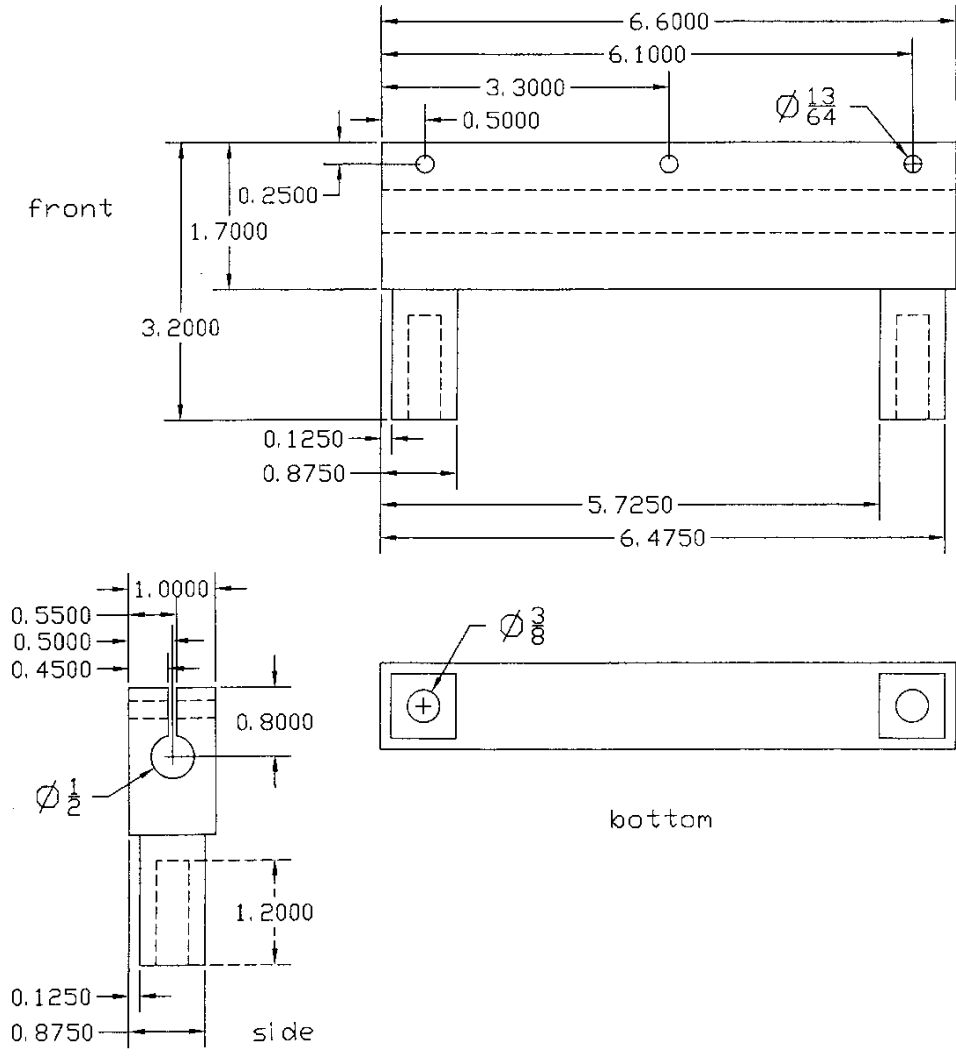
CAD details of the inner hip joint. This piece is machined from an aluminum block.
